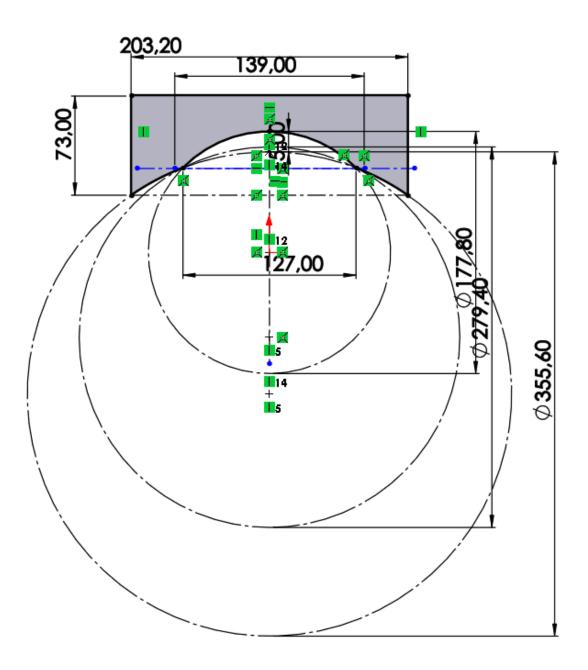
Solidworks Drawing of Design Space with Different Weapons
